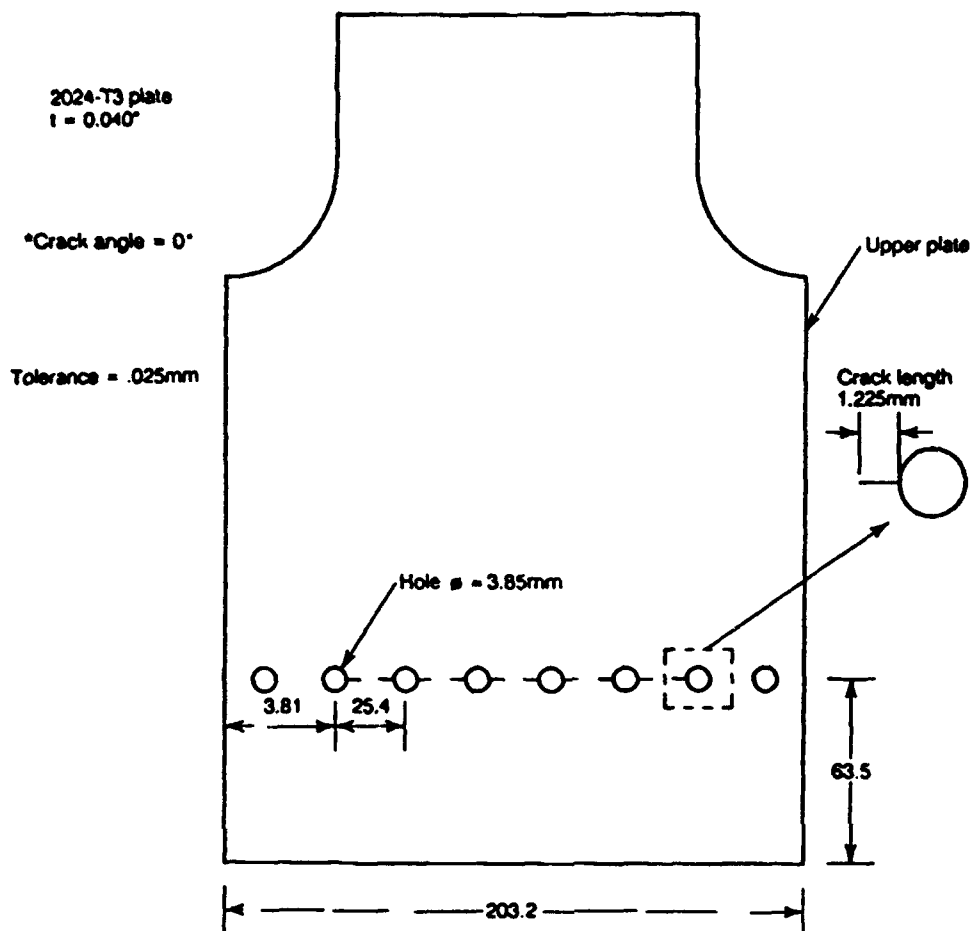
DETAILS OF SPARK ERODED CRACK STARTERS
